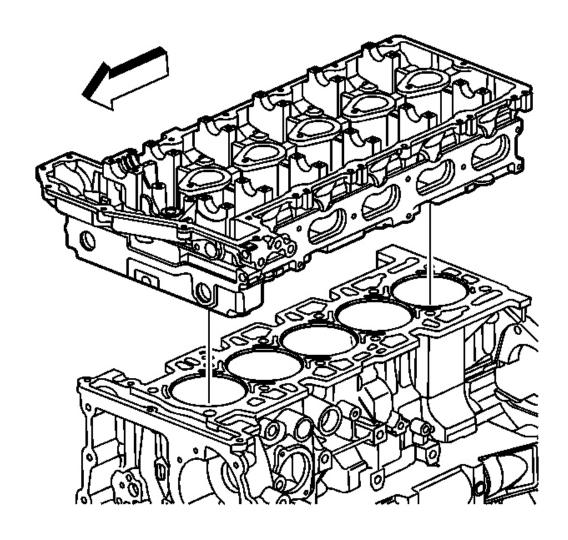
View Of Cylinder Head Courtesy of GENERAL MOTORS CORP.
